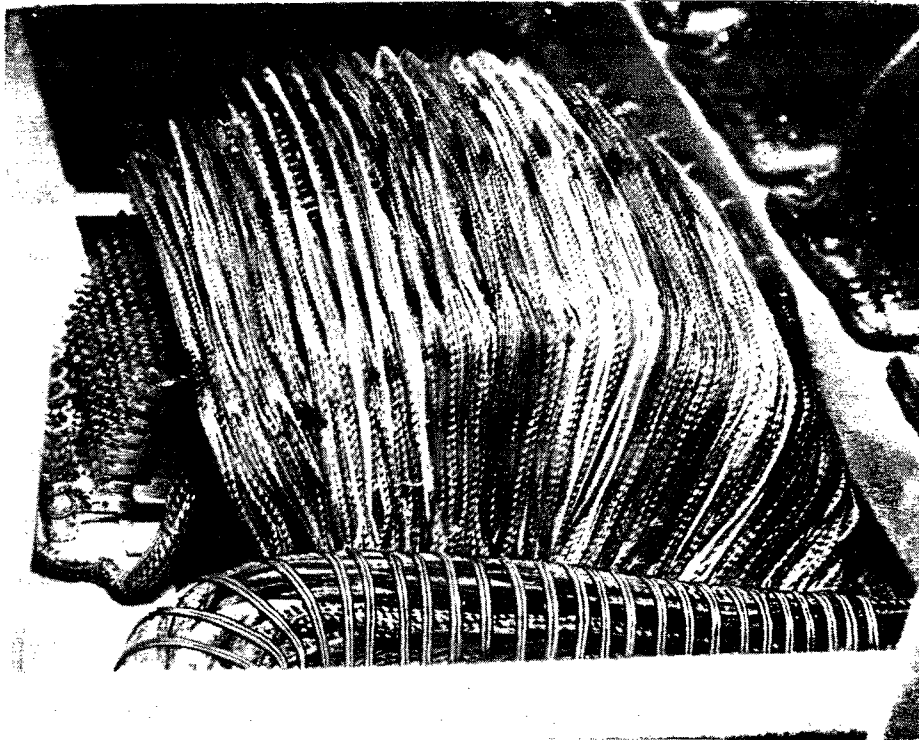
MOTOR UNISELECTOR - COMPLETED FORM.
